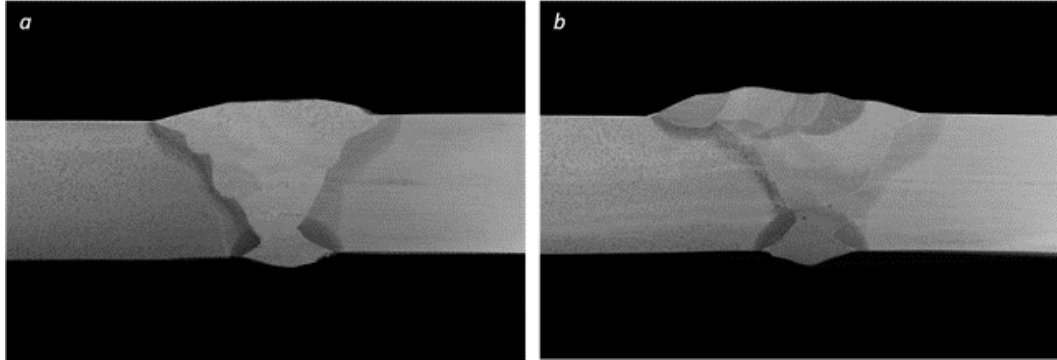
Macrographs of welded specimens. (a) ER70S-6 filler; (b) ER110S-G filler
